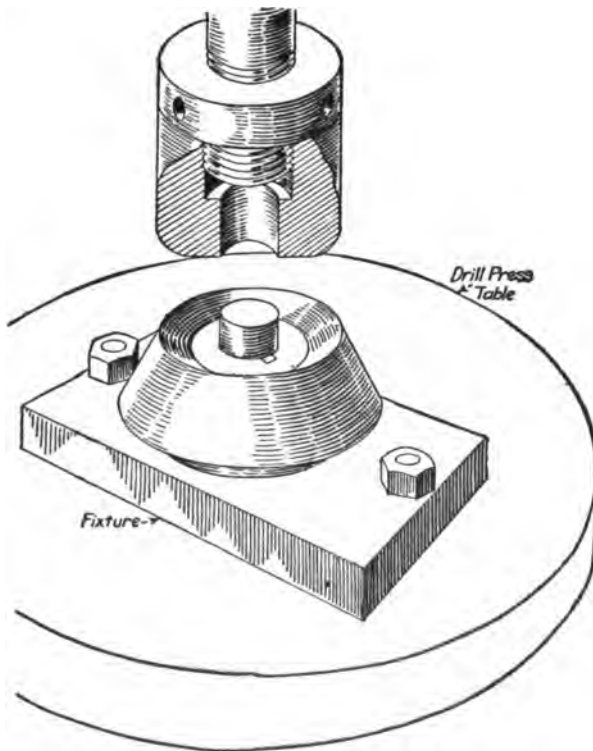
SWEEP TOOL FACING THE BEVEL GEAR
